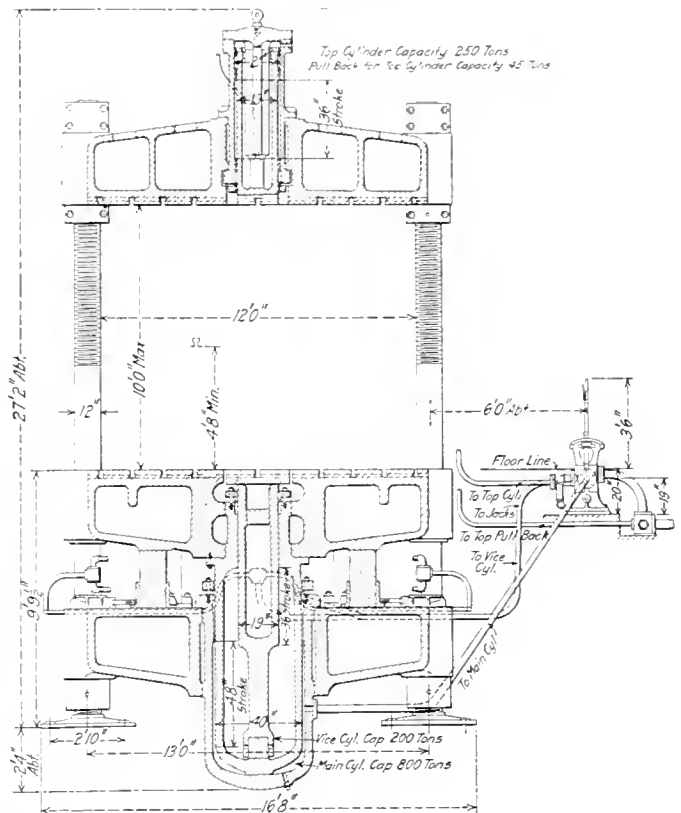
Vertical Section Through Hydraulic Flange Press.
